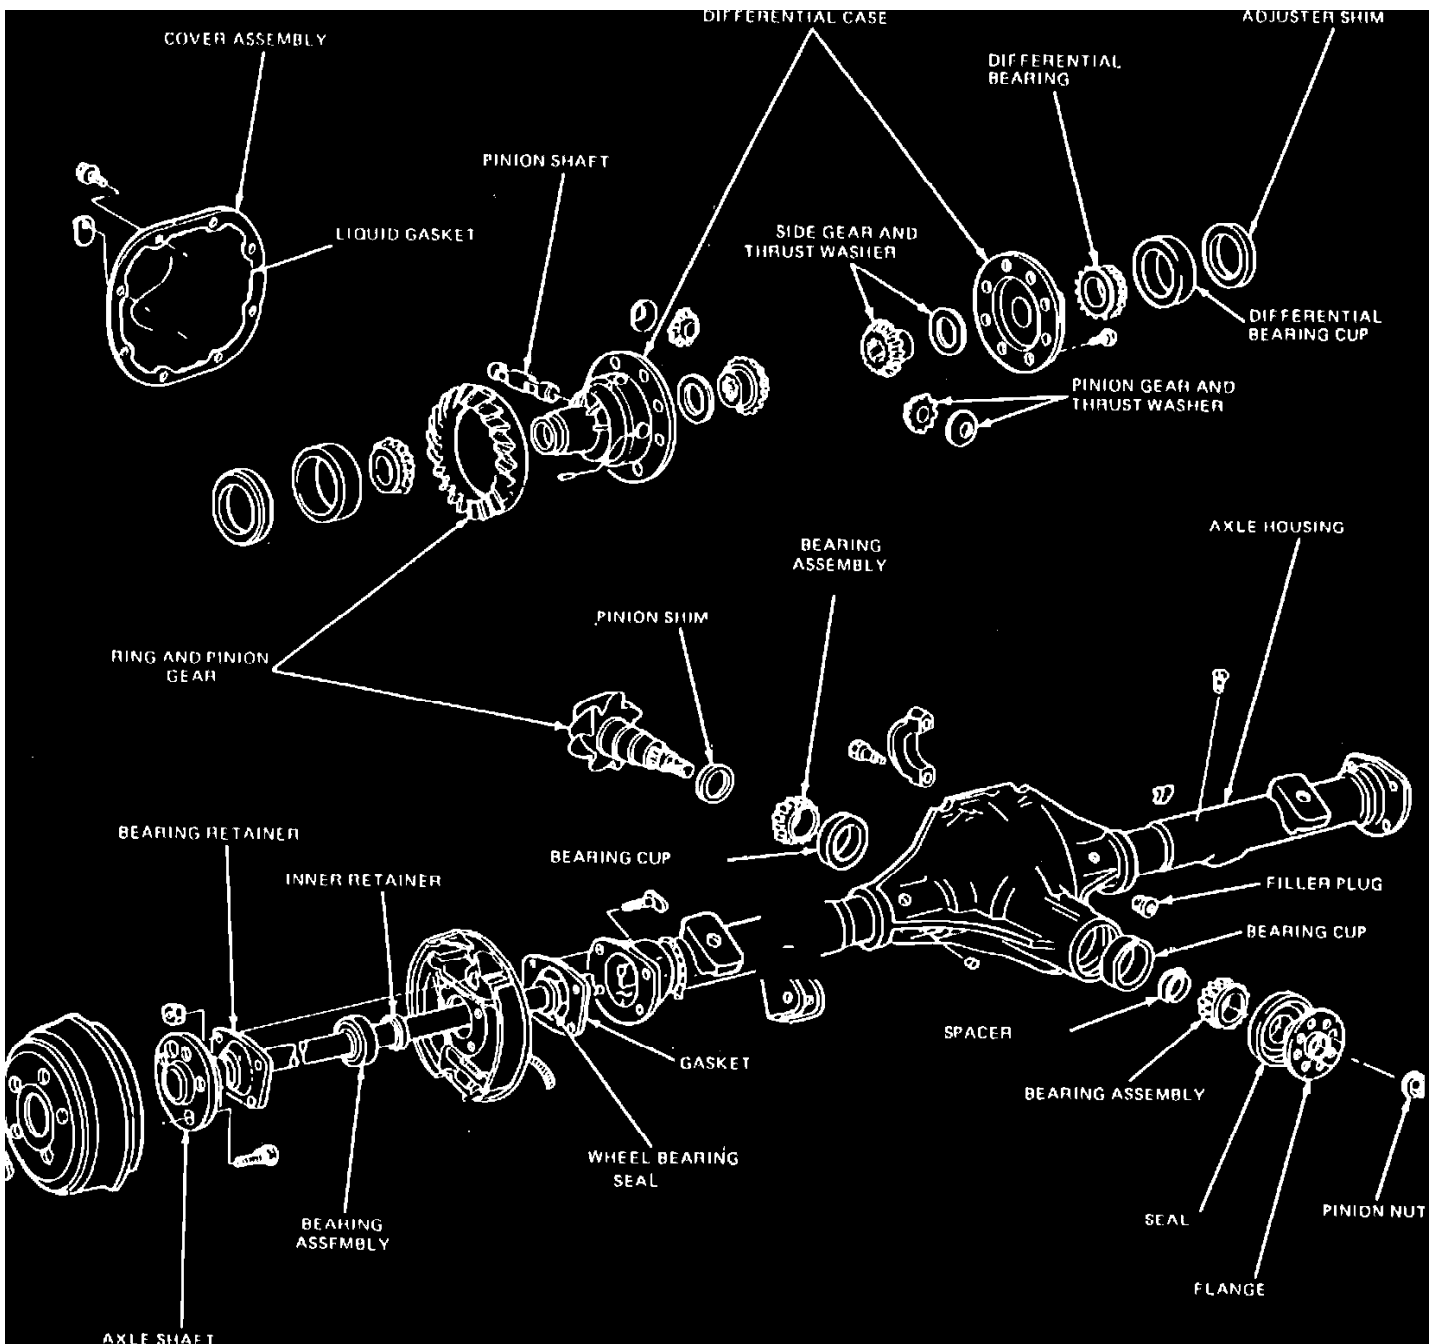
Disassembled view of Ford 6 3/4 inch ring gear axle
